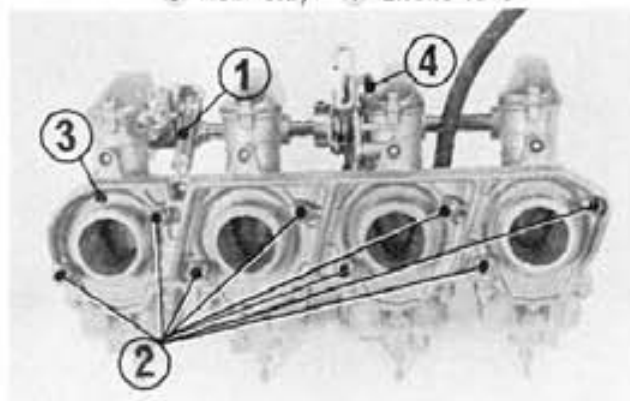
① Throttle return spring ② Screw ③ Stay plate ④ Accelerator pump spring
